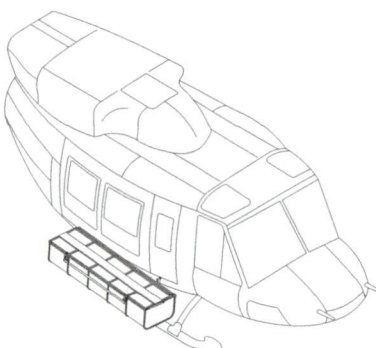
955 Extra Large Cargo Basket Installation
